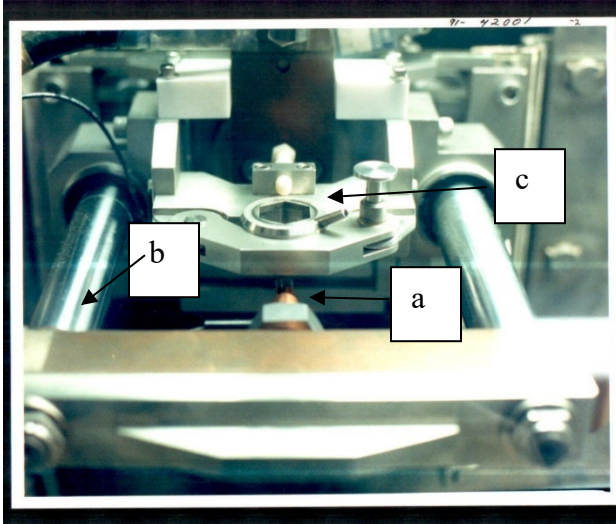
Weld head used in this study, a indicates the PW electrode, b the ram that applies the force, and c the weld fixture support
